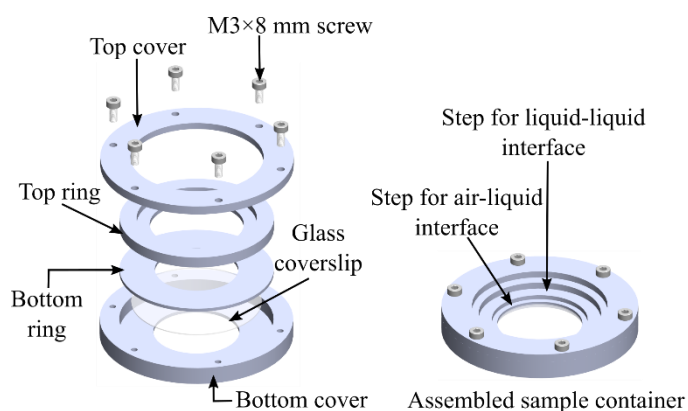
Schematic illustrations of the stainless-steel sample container that serves as the sample trough. (Left) Exploded view with all the components of the sample container. Parts are compression fit with M3×8 mm screws. (Right) The assembled view shows the various internal diameters of rings that create pinning points for fluid-fluid interfaces.
